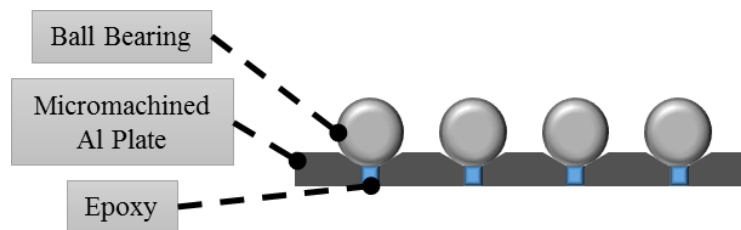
3-mm diameter ball bearing pattern fabrication
